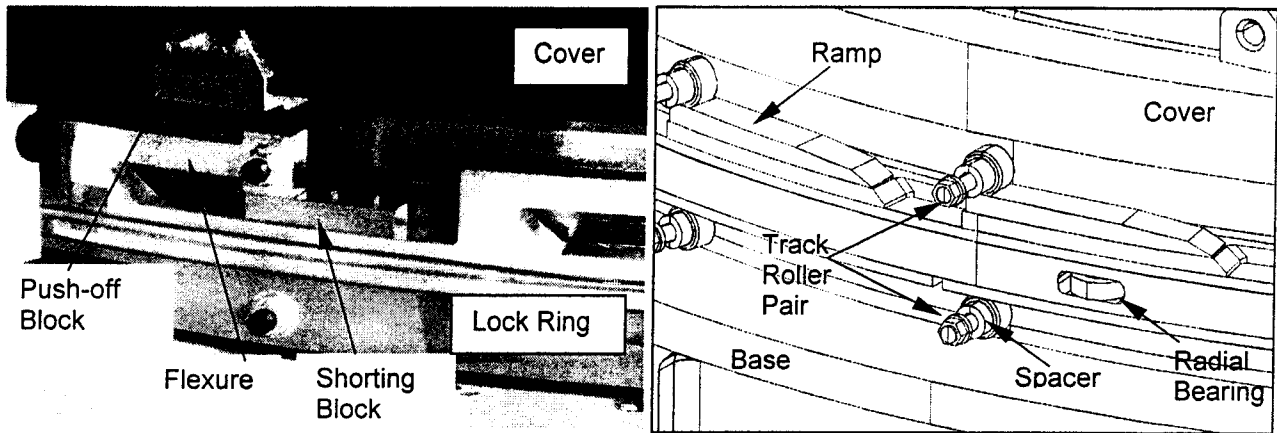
and 5b. A detailed view of the Lock Ring Assembly is shown. The figure on the right has the Lock Ring removed for clarity.
